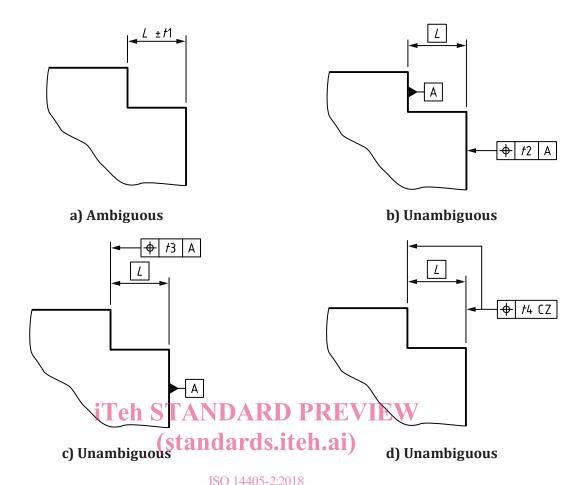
Example of a linear step dimension, a) and three different solutions using geometrical specifications, b), c) and d)
